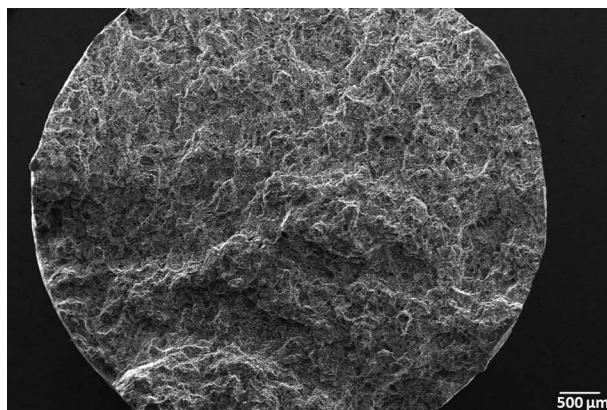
View of fracture surface of a tensile-tested A356. Note the flat nature of the fracture surface indicating little macroscopic deformation
